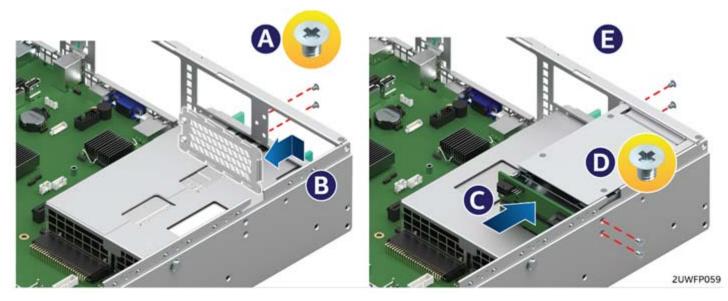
2 x 2.5" Rear Mount Backplane Module Installation
